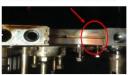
Bush bearing shows damage on the right hand side after 100,000
